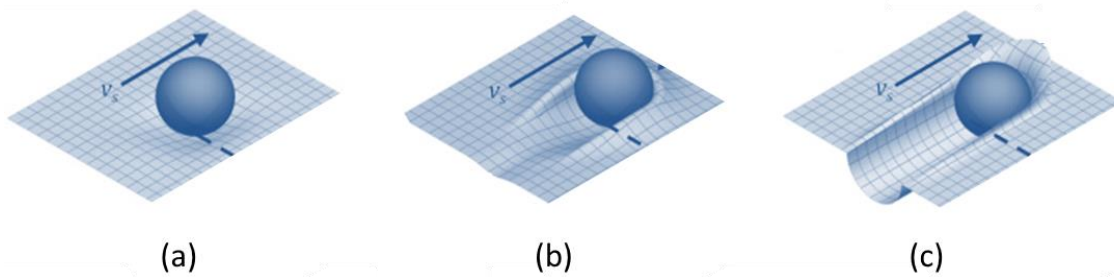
Material removal mechanisms in grinding [65]: (a) rubbing, (b) ploughing and (c) cutting [65]
